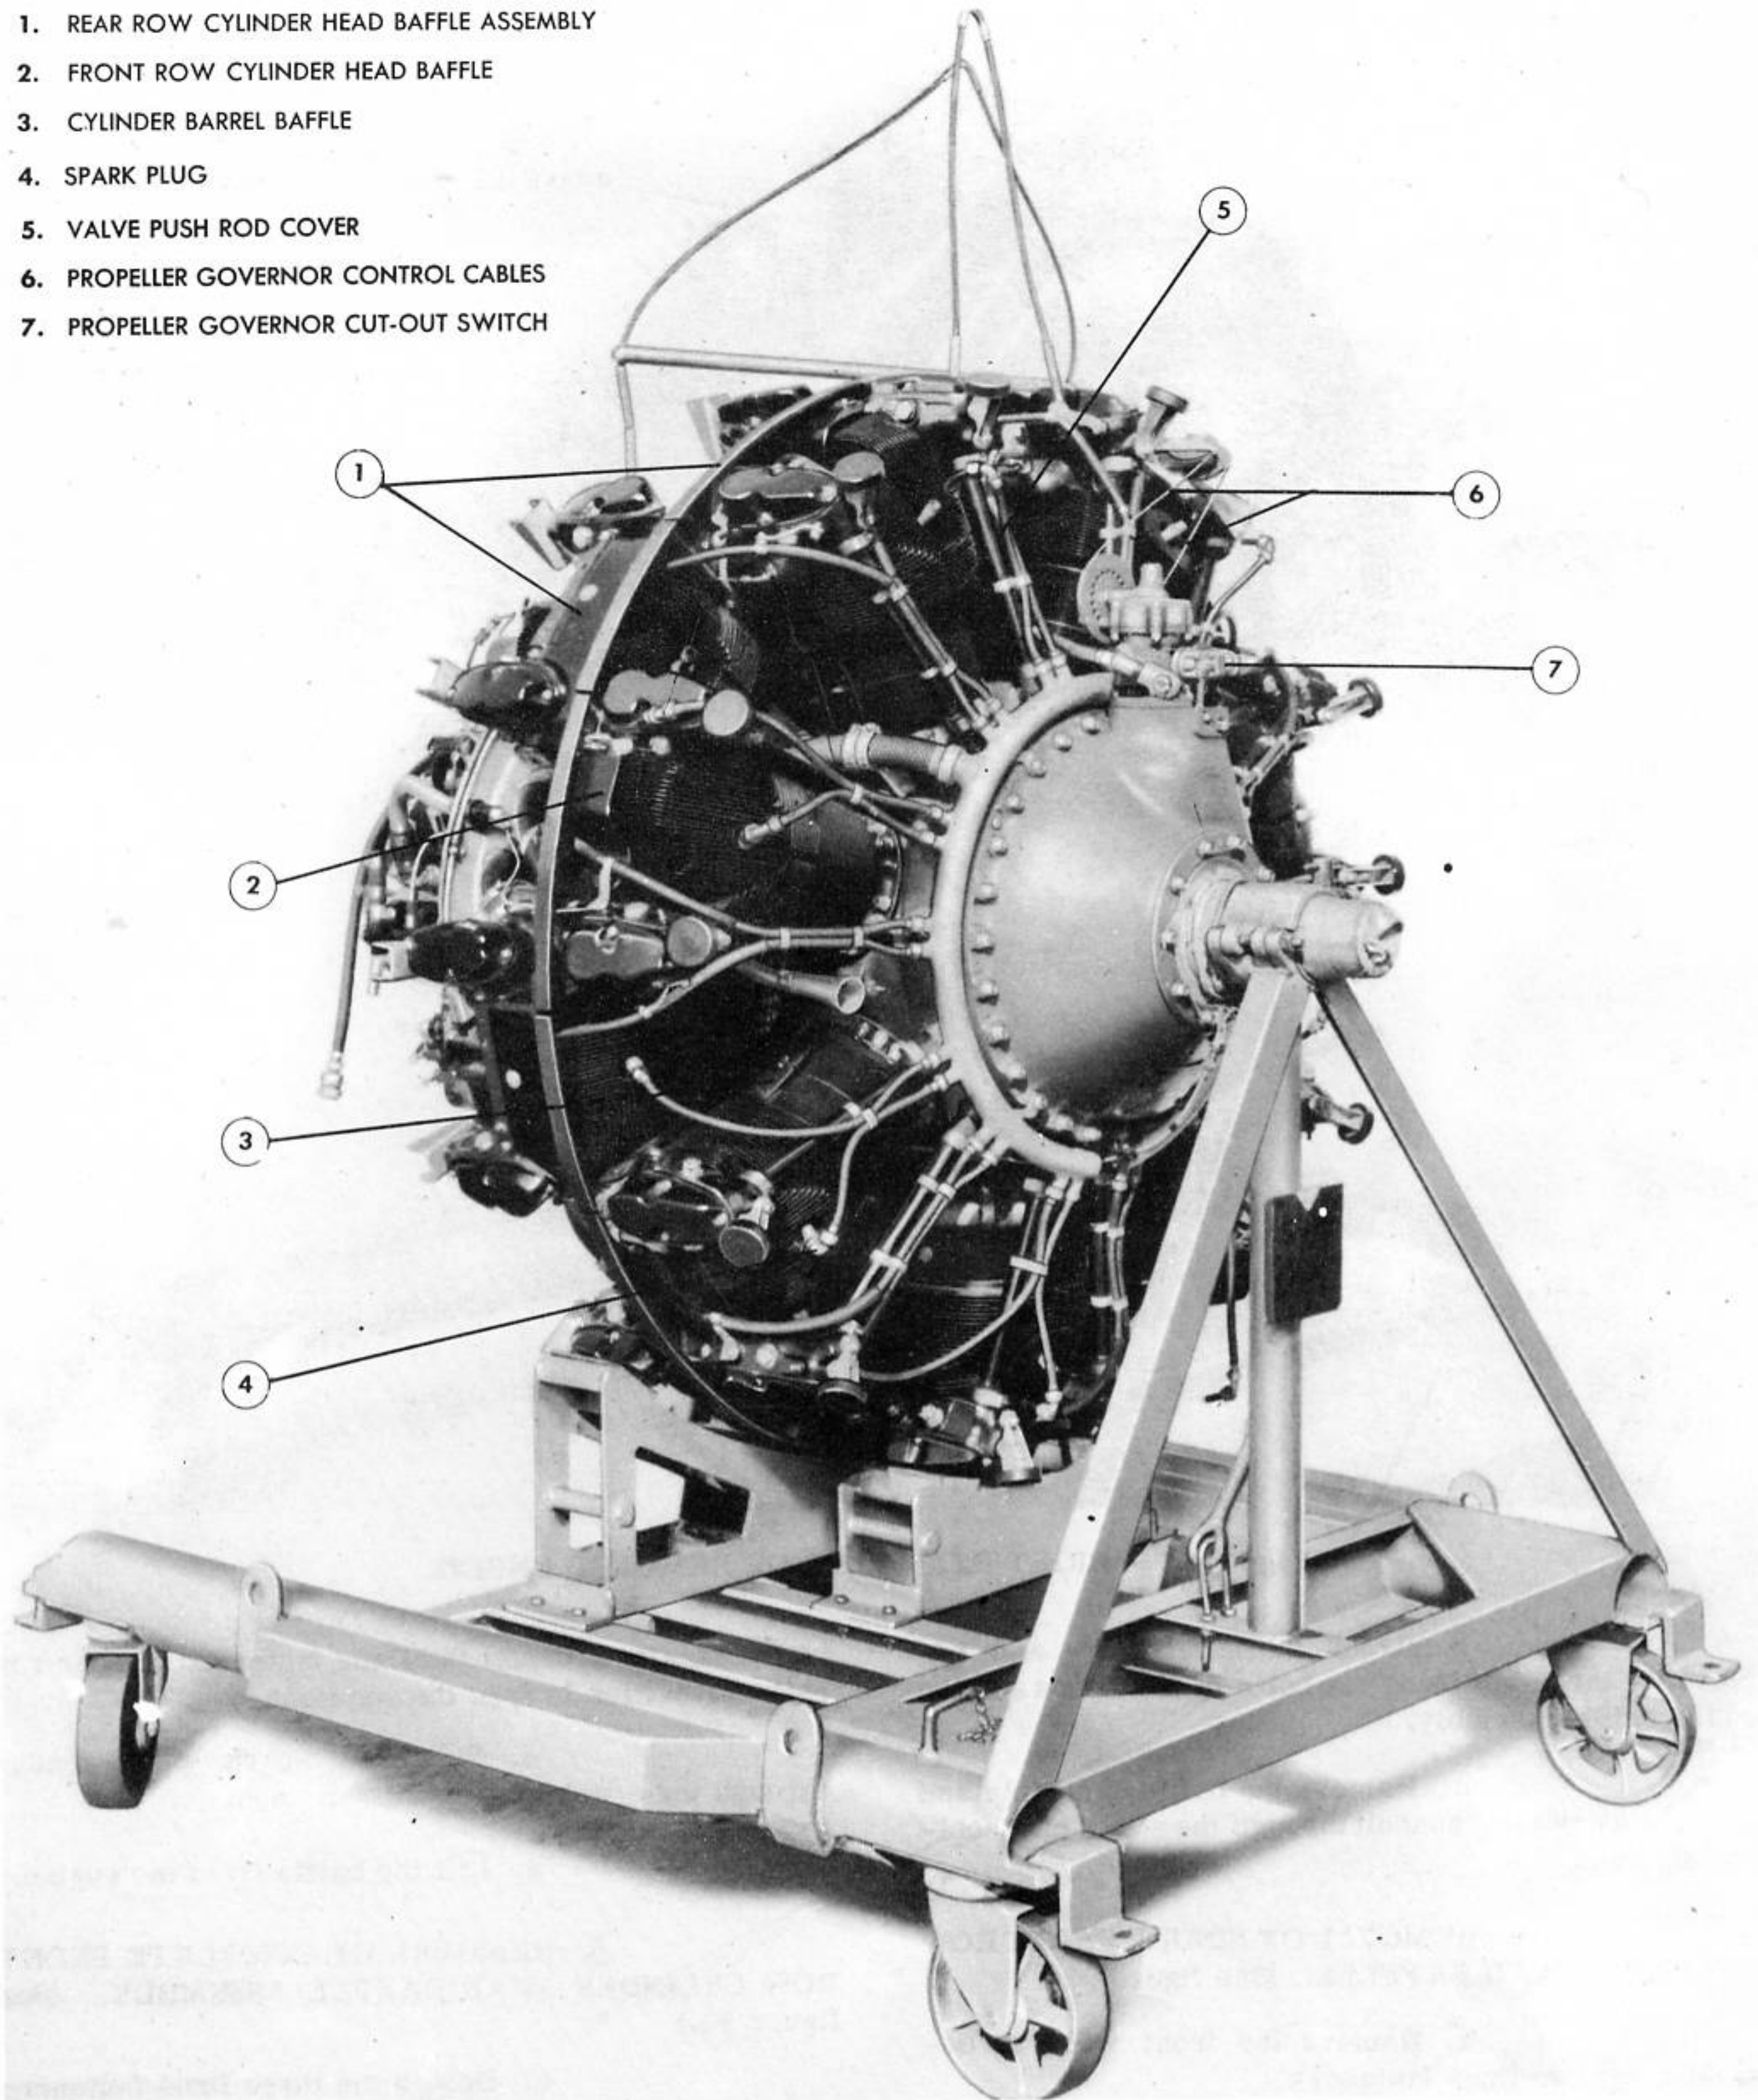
LEFT FRONT VIEW OF REMOVED ENGINE
